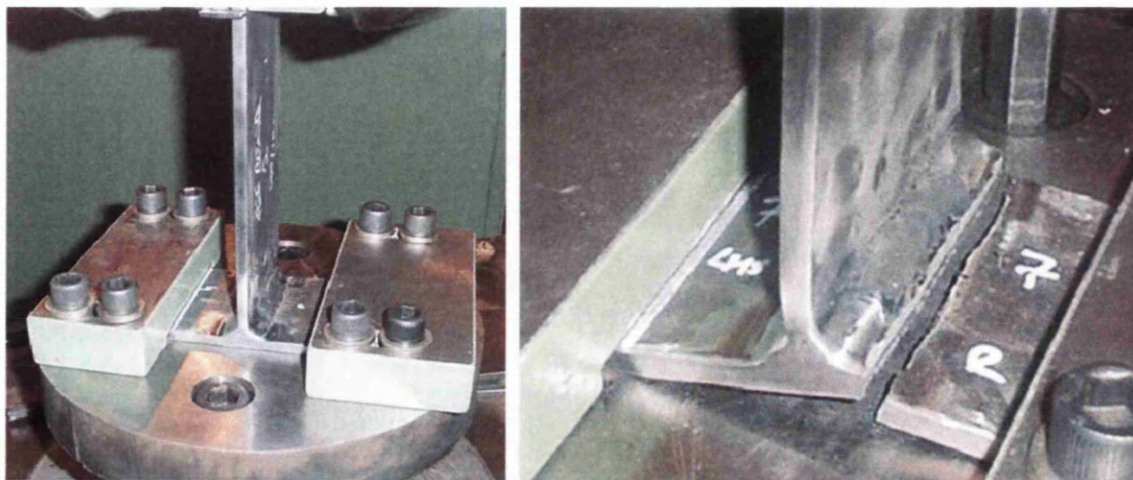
Load-bearing cruciform 10mm weld leg failure modes- sample 2.3 weld toe (left) and sample 2.4 weld throat (right)
